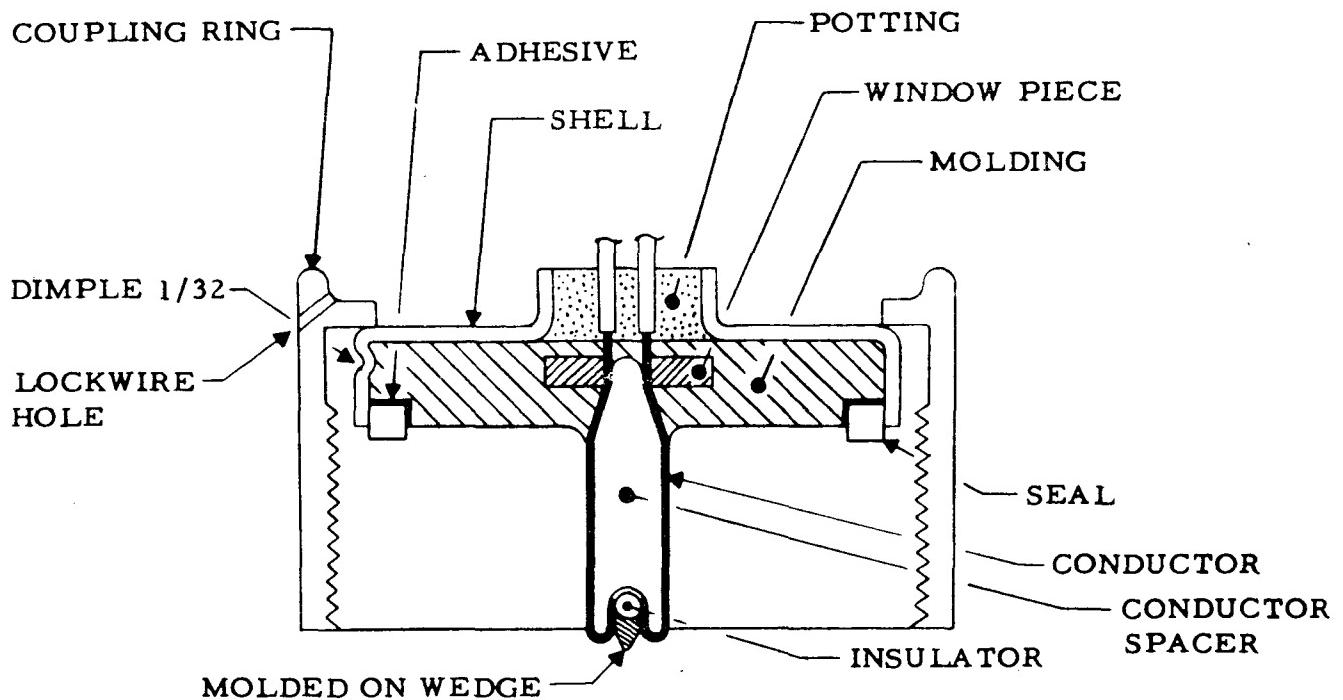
CYLINDRICAL PLUG (DIMPLED)
